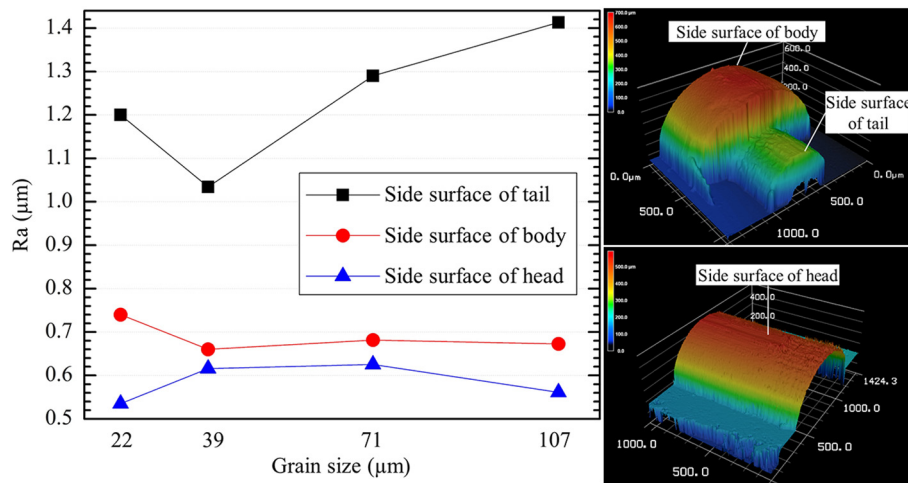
The surface roughness at the side surfaces of tail-designed plunger parts.
